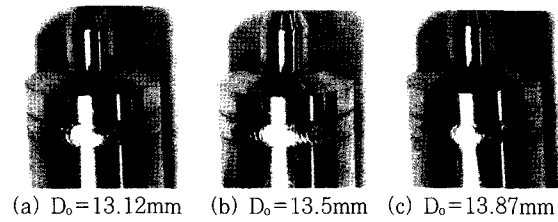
Bead shapes with $D_o=13.12\text{mm}$, 13.5mm , 13.87mm of end caps and laser power 280W. ($\times 2.5$)
